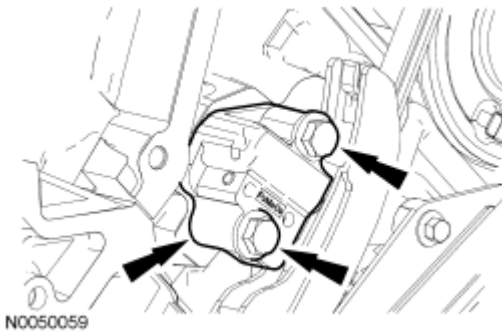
Locating LH Primary Timing Chain Tensioner Bolts
